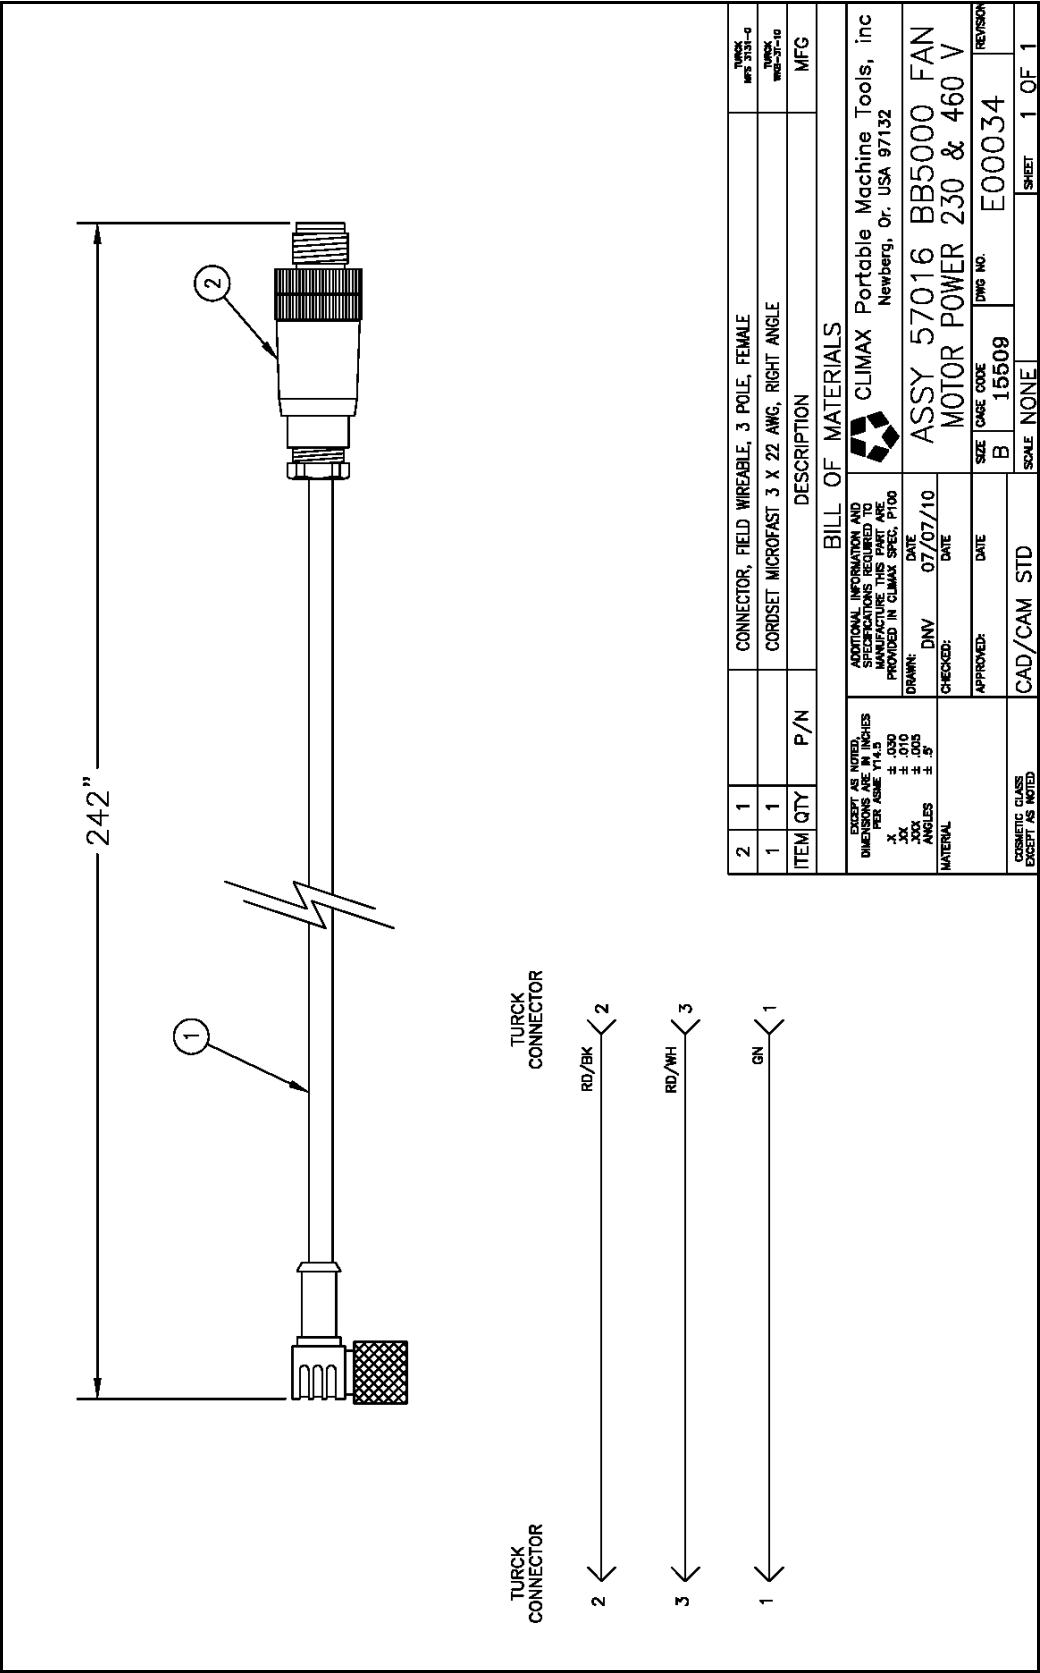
BB5000 MOTOR 230V AND 460V FAN ASSEMBLY (P/N 91811 E00034)
